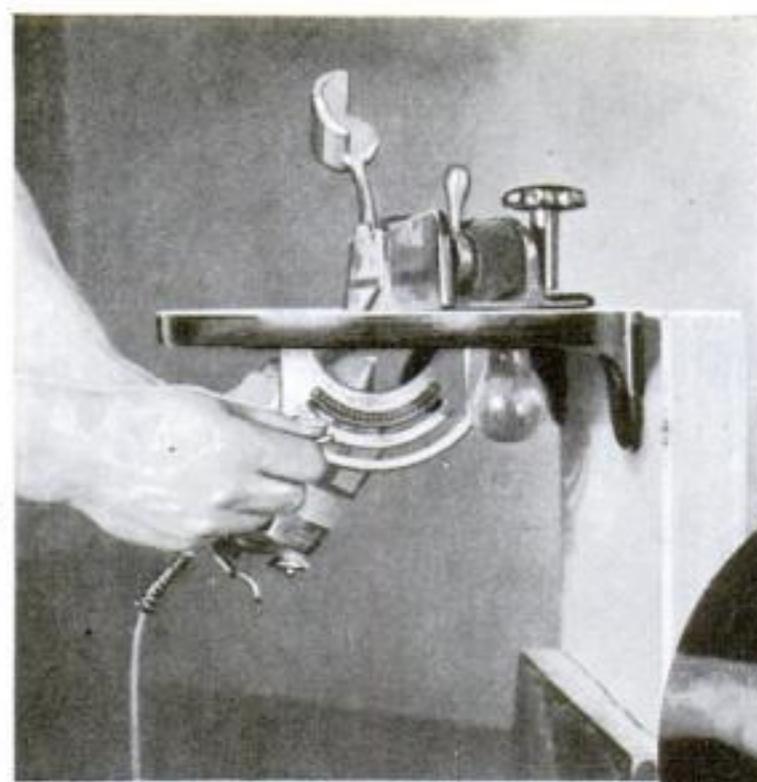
Side view of a portable table shaper showing the quadrant used in setting the cutter at an angle. The entire motor and cutter unit is tilted on the quadrant.
